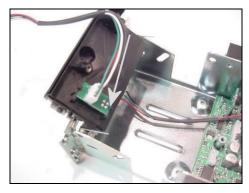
Paper Guide Sensor - PayCheck™ 1, 2 & 3
